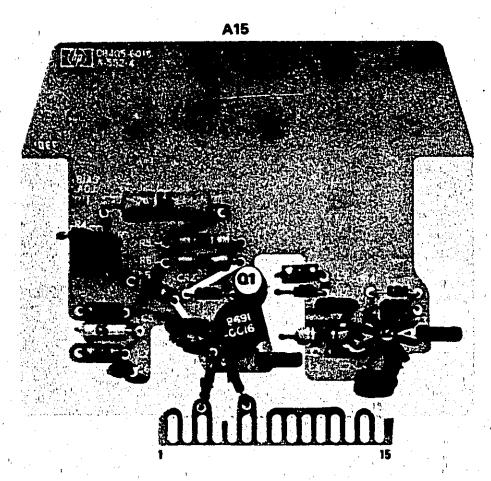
C. A15 Pulse Generator Assembly Component Identification (ERRATA)
